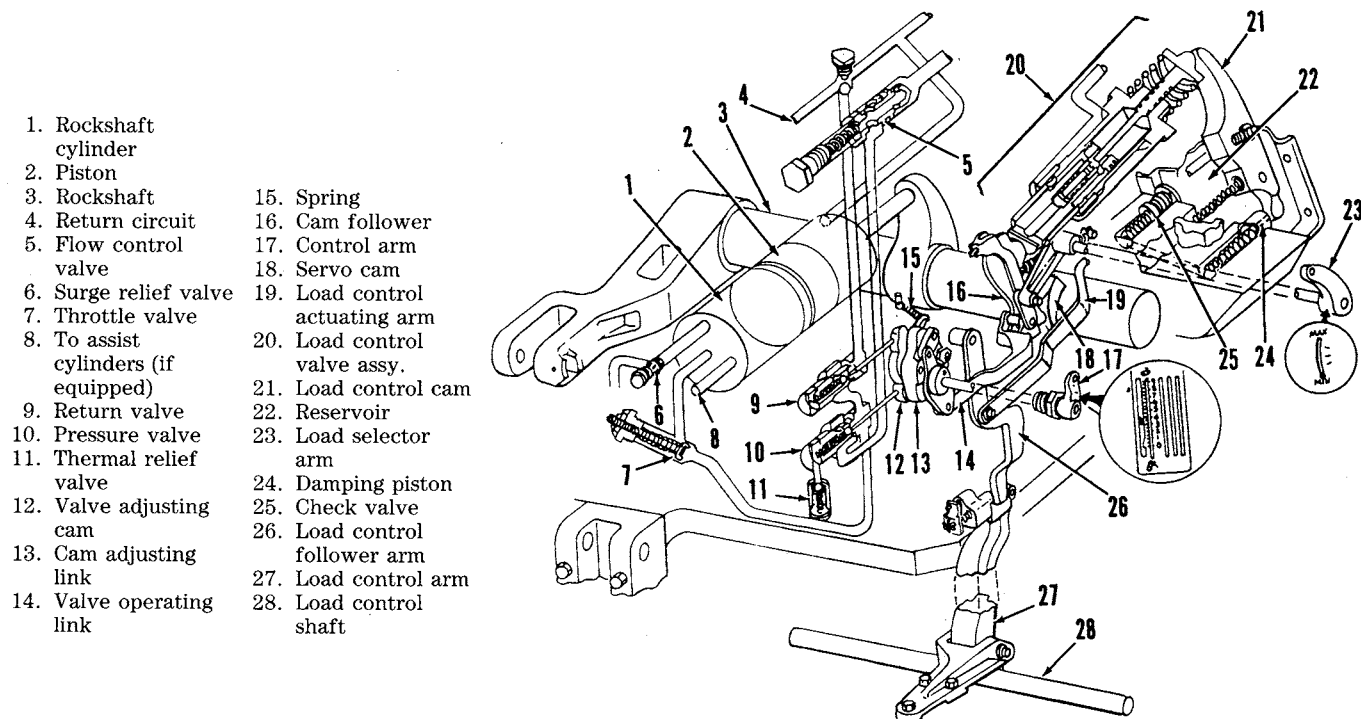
Schematic view of rockshaft assembly used on Models 4050, 4250 and 4450. A mechanical load sensing draft control system is used on these models.
